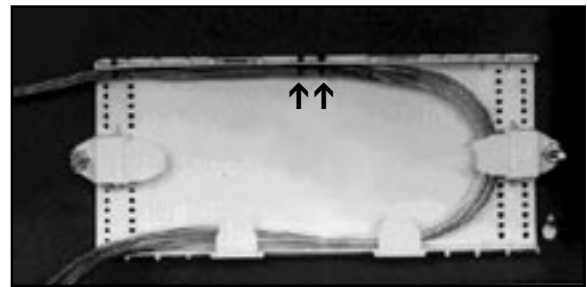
SECURING BUFFER TUBES AND TRANSPORT TUBES TO TRANSITION ASSEMBLY
